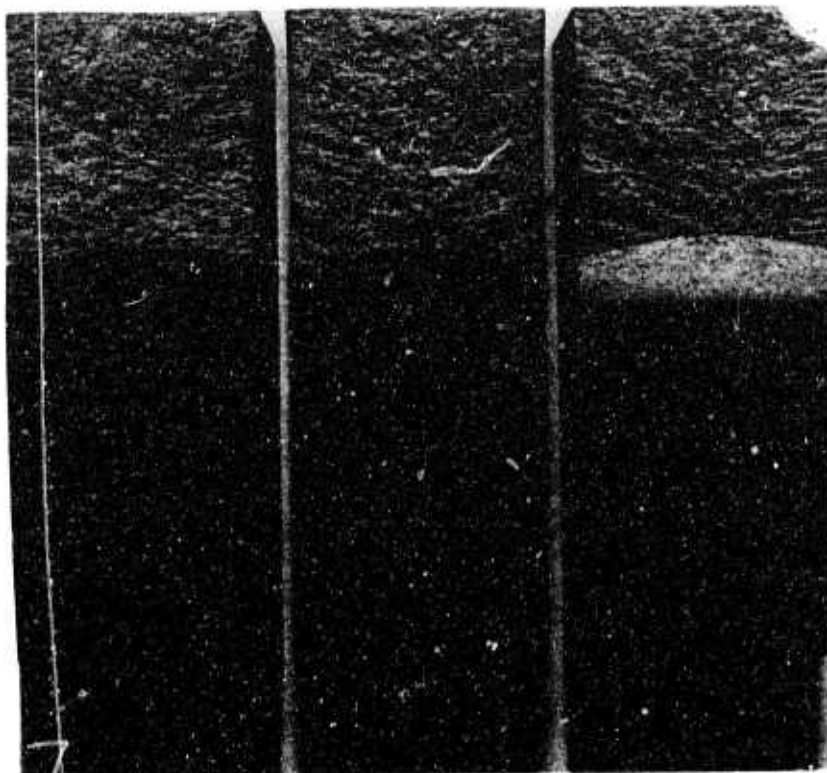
Fracture Surfaces of ASTM A-286 at 76 K
